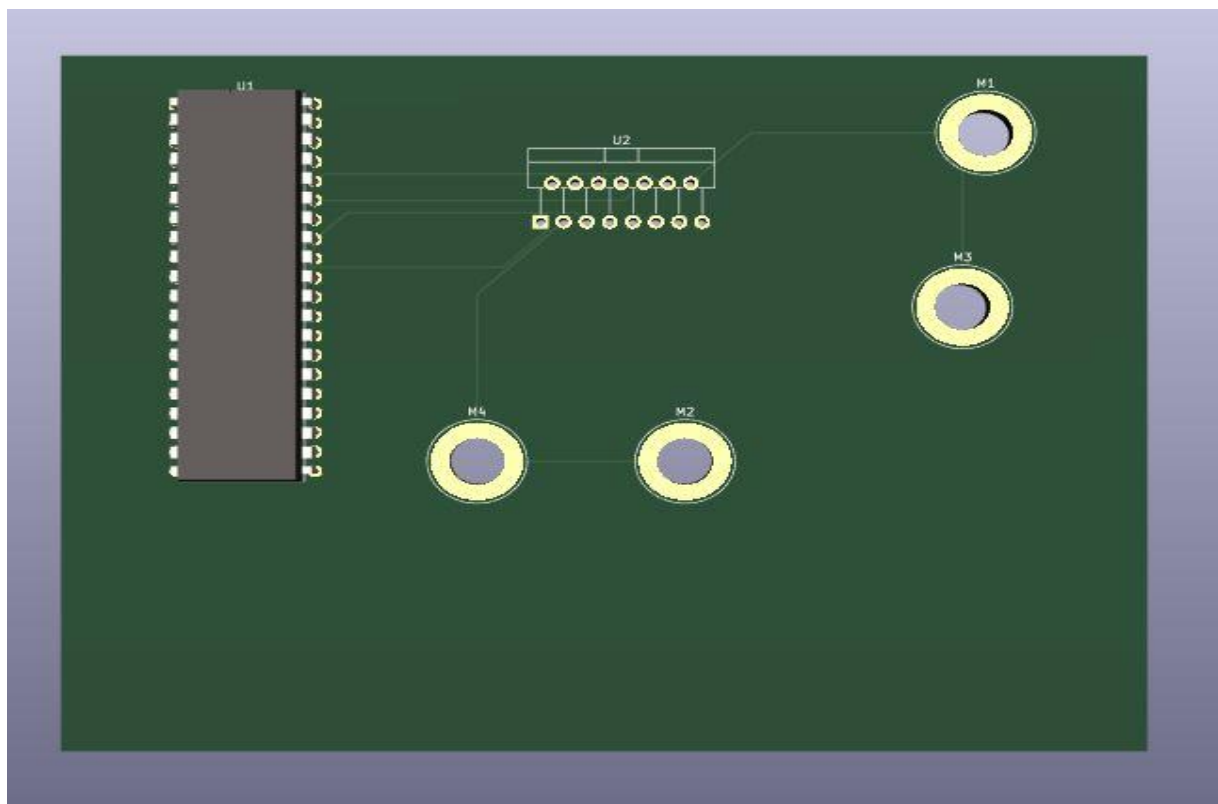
Component View of Motor Driver and DC Gear Motors PCB Design
